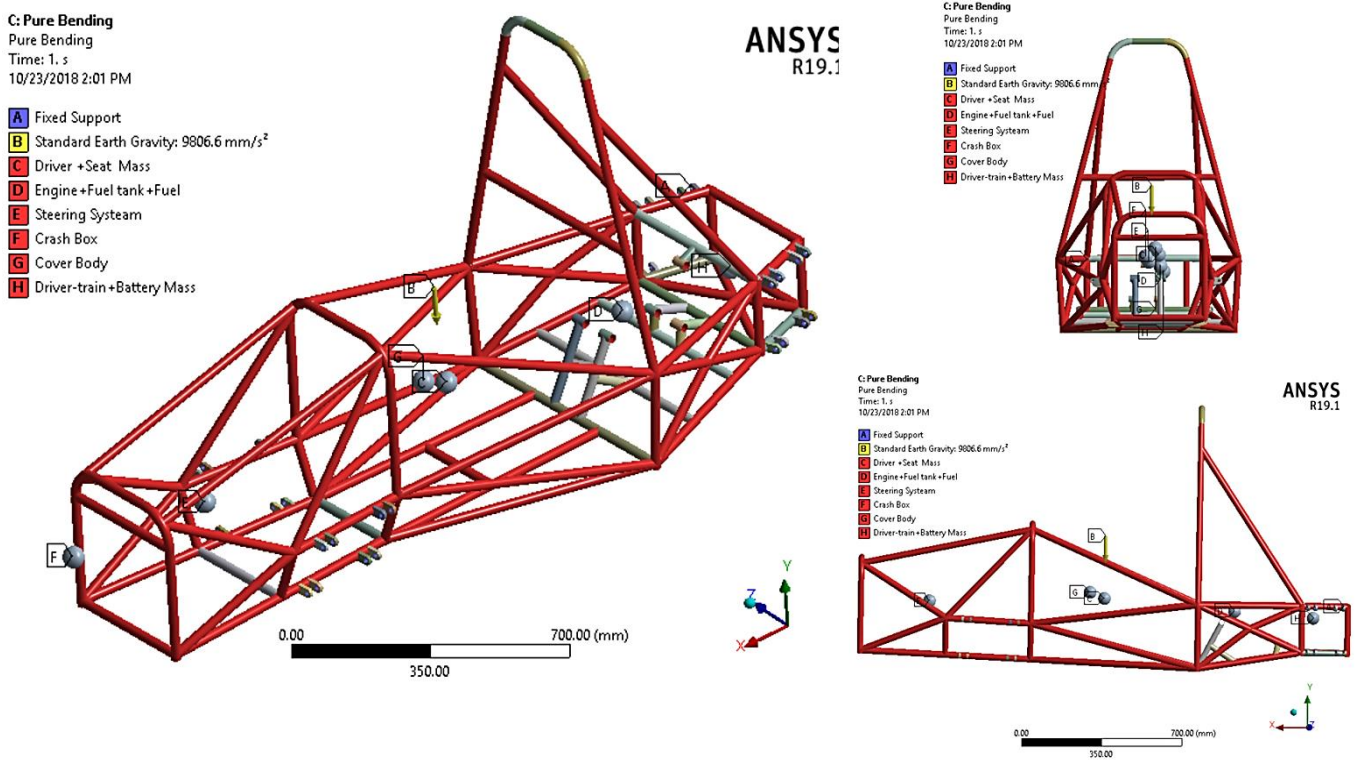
Pure bending load applied on the Formula SAE M2 Chassis (front, side, and isometric view)
